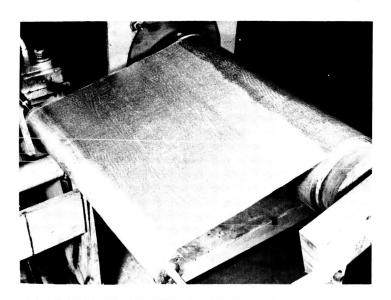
Mandrel Assemblies Used for Fabricating Tensile Cylinders
